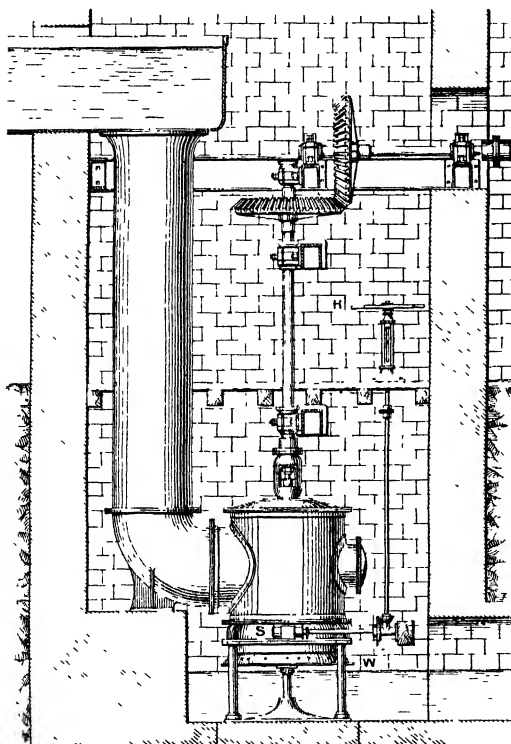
Girard Turbine (W. Gunther & Sons, Oldham)
